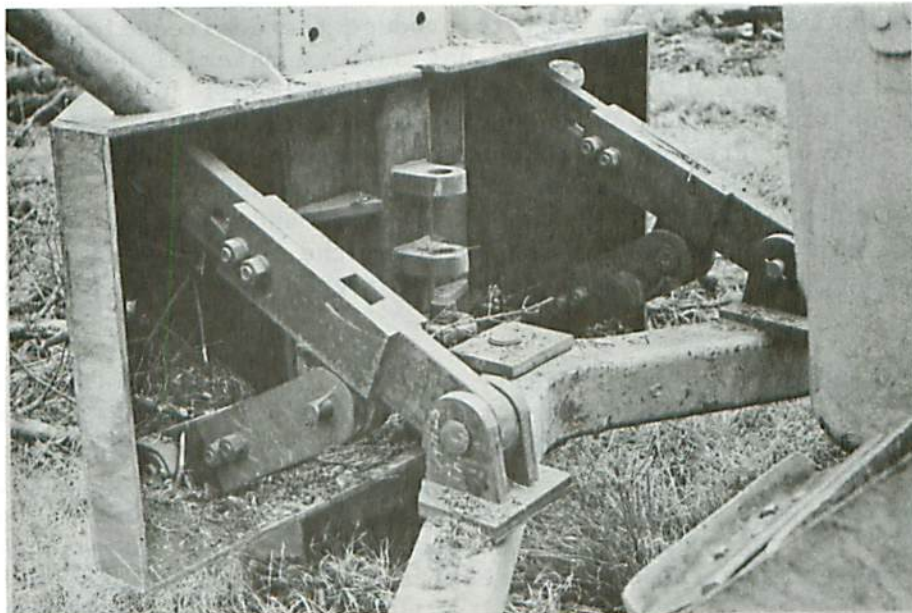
Attachment of prototype V-blade to bulldozer C-frame required that ears be welded to C-frame and adjustable trunnion arms be used as shown.
